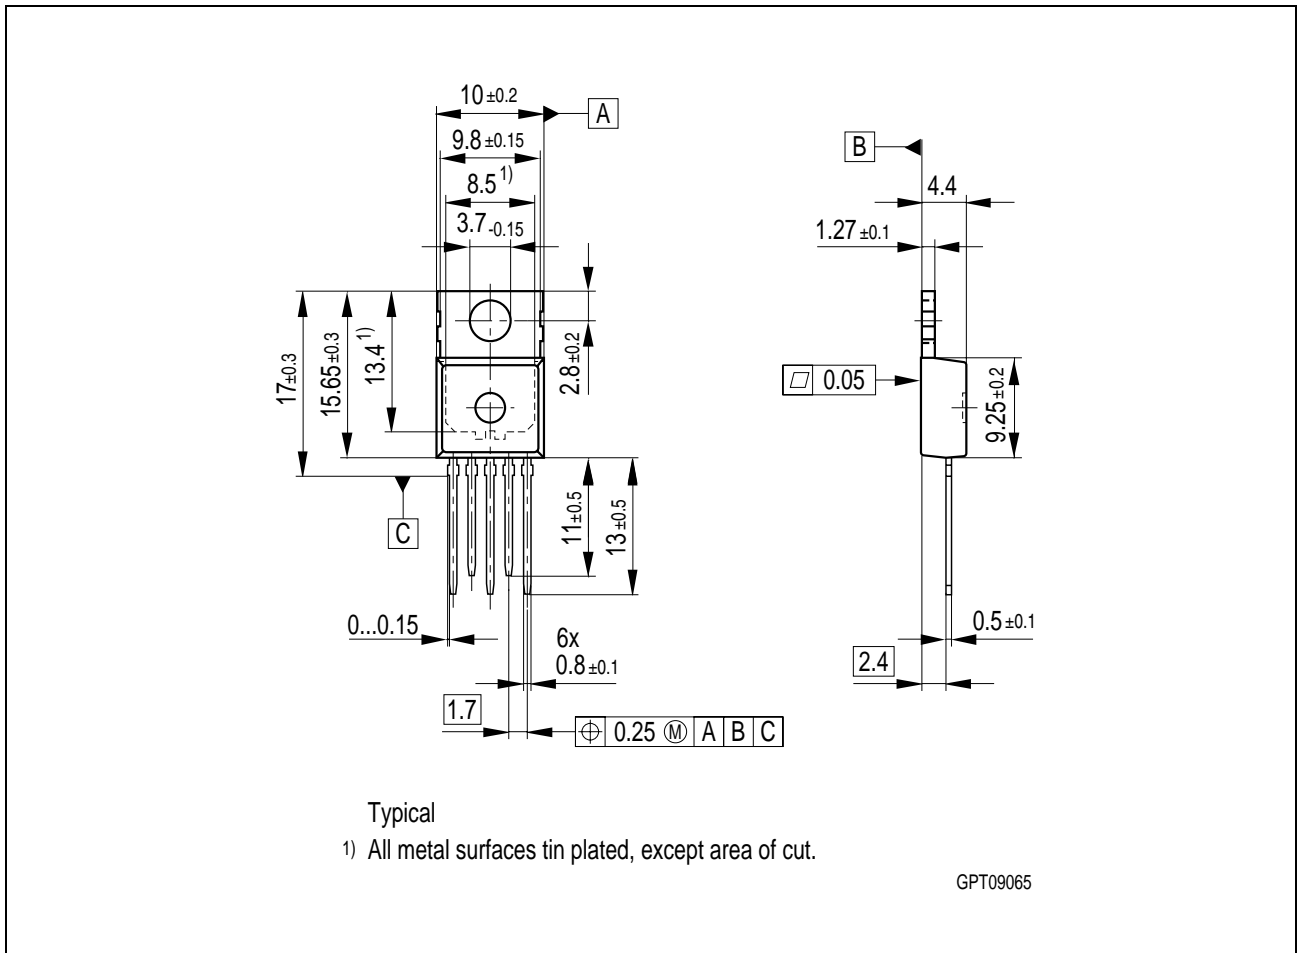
P-TO220-5-12 (Plastic Transistor Single Outline)
